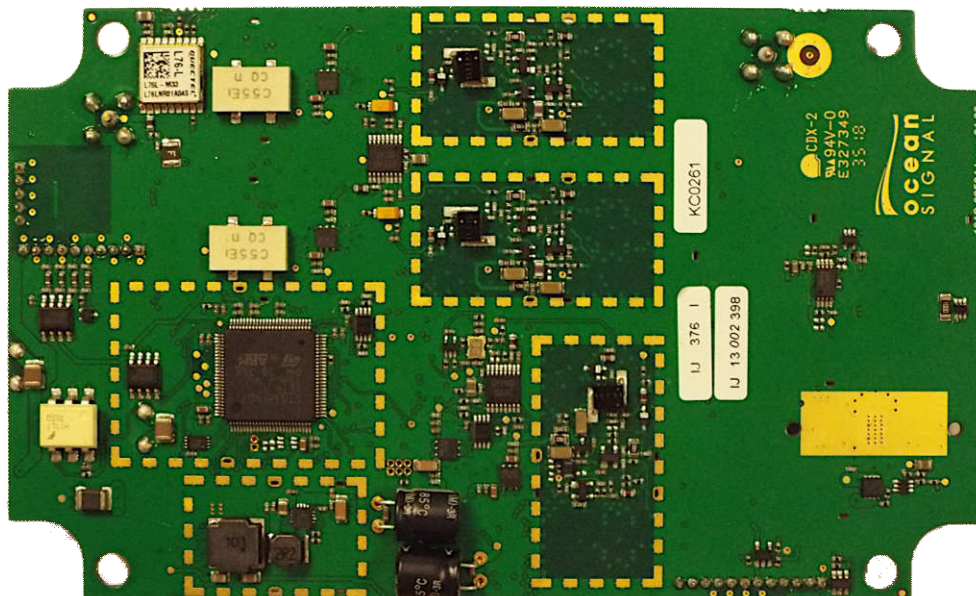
ATB1 Main PCB – Bottom side, screening cans removed
